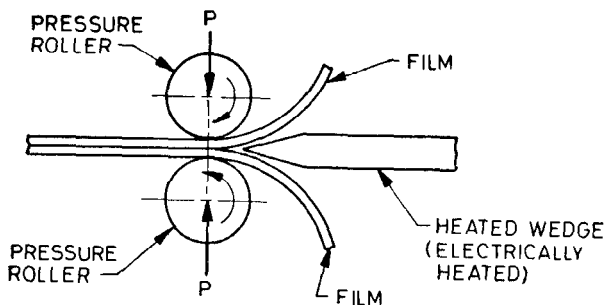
HEATED TOOL WELDING OF A LAP JOINT WITH A HEATED WEDGE
